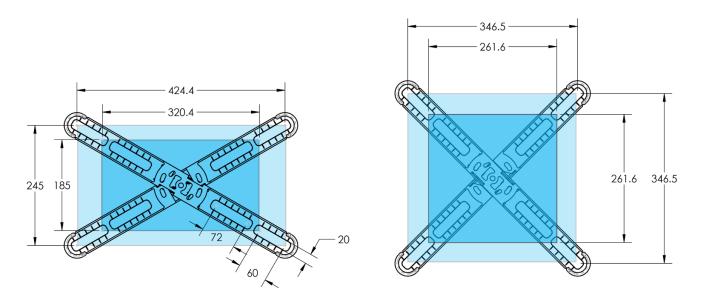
Technical Dimensions of Large Suction Cup Brackets
